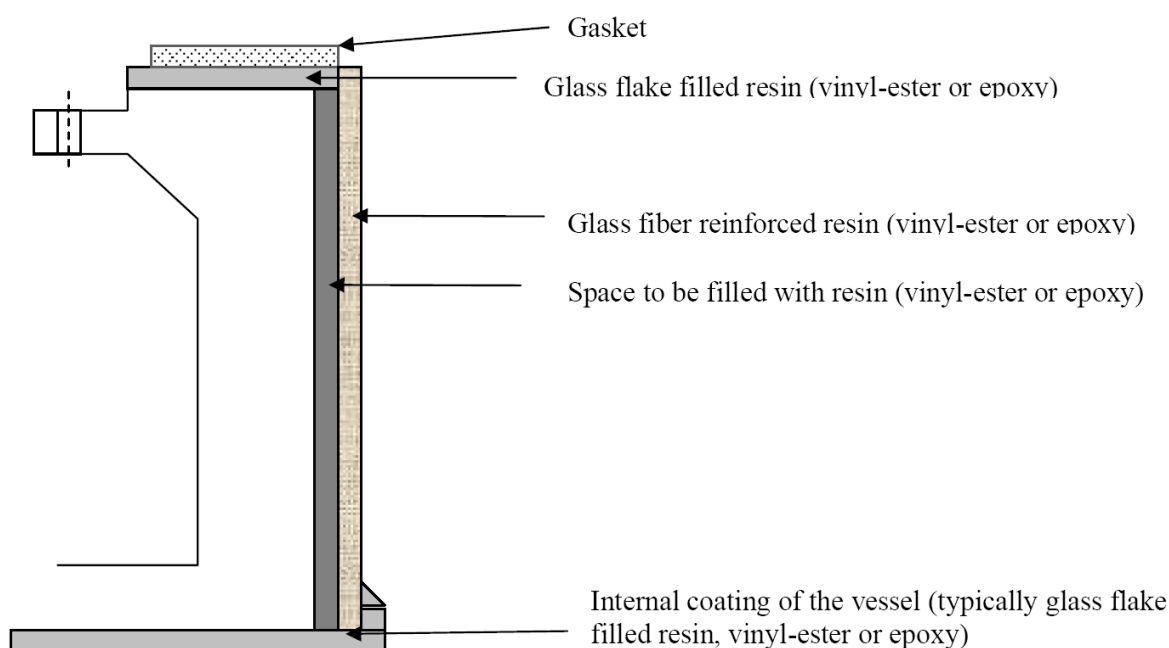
Internal Coating of Nozzles for Low Pressure Vessels and Tanks
